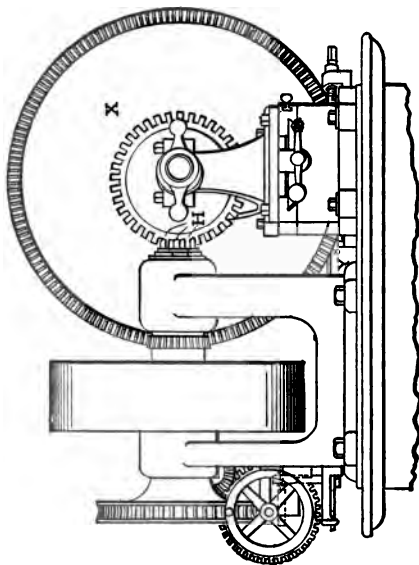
Ashley's Machine for Generating Sager Gears.
